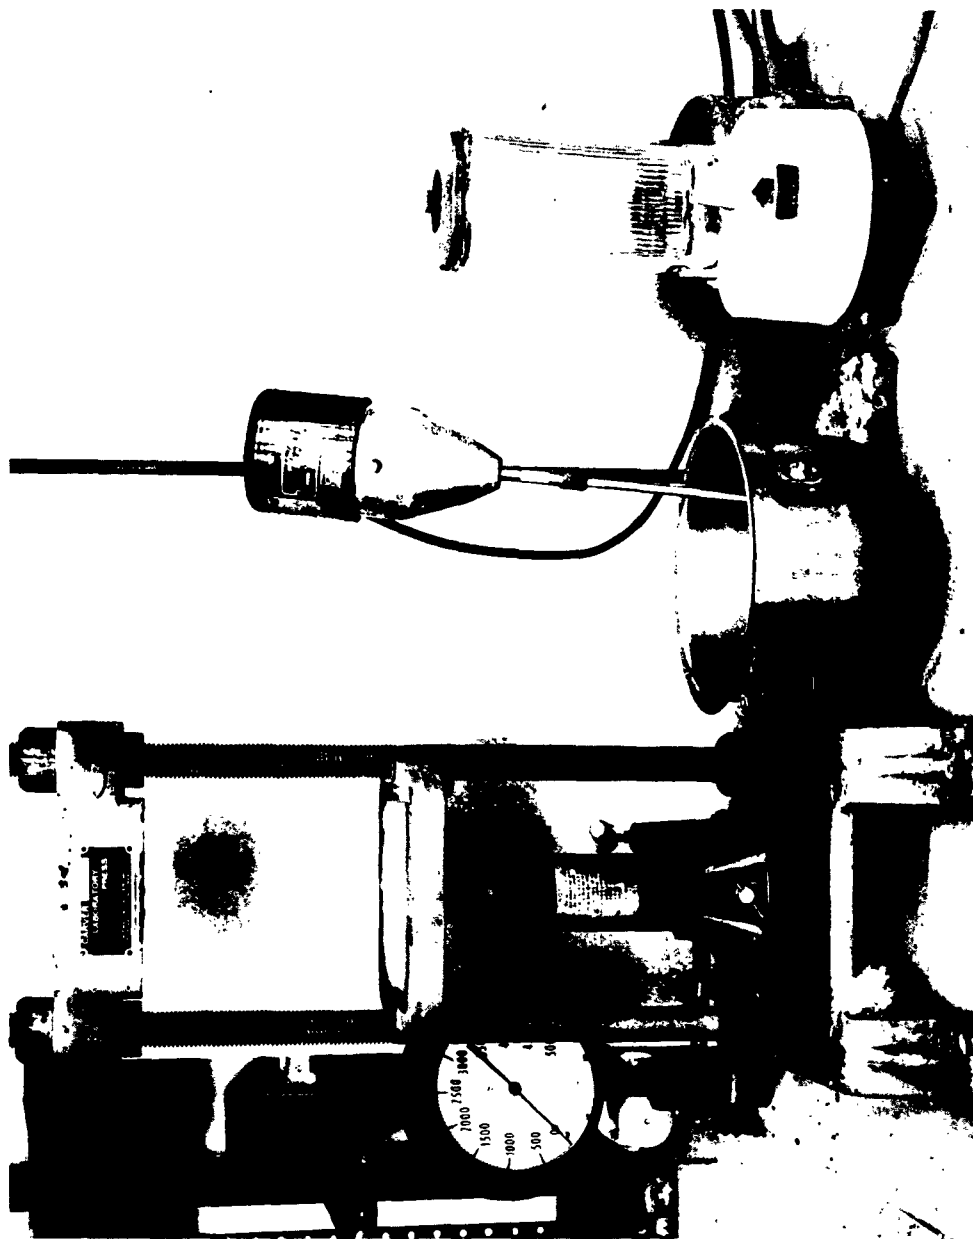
Related Accessory Equipment for Forming Felted Compacts.
